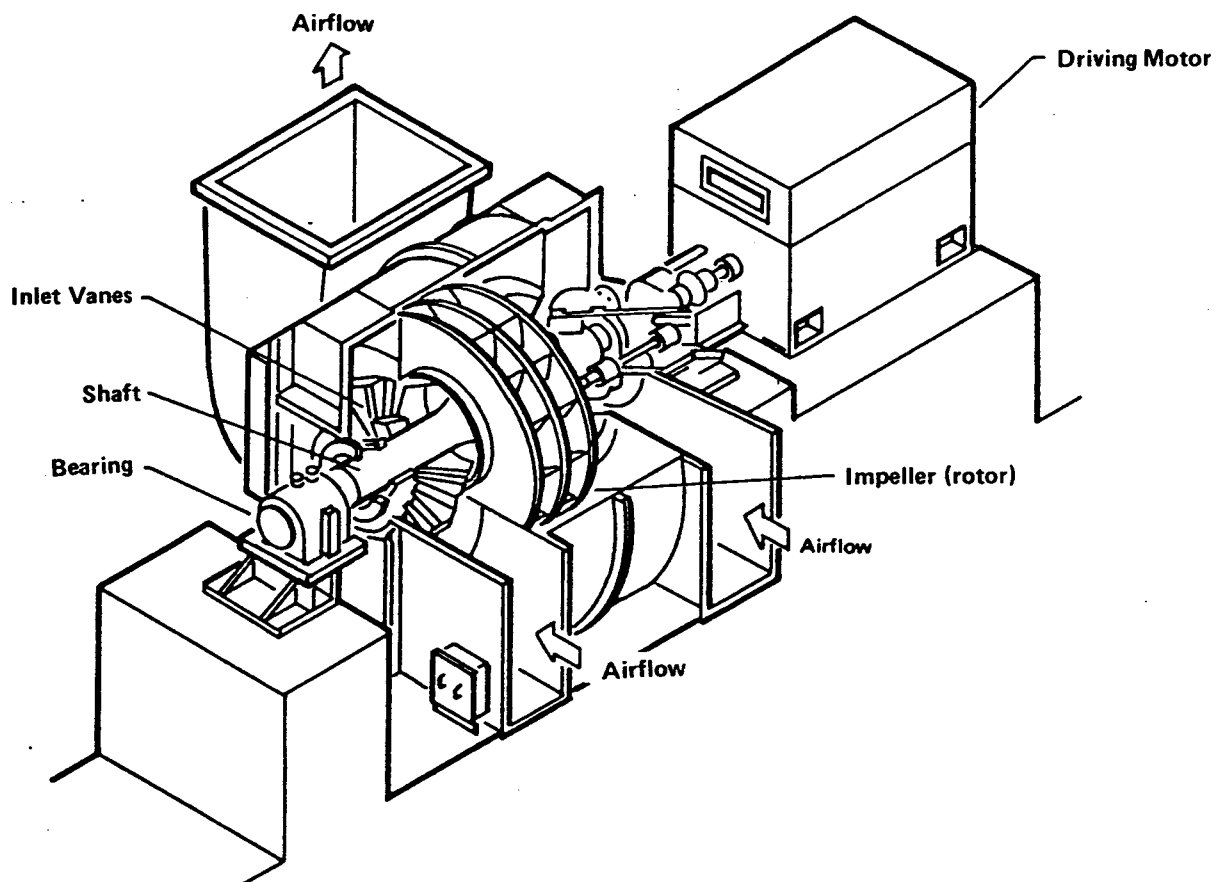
FORCED DRAFT FAN WITH INLET DAMPER
